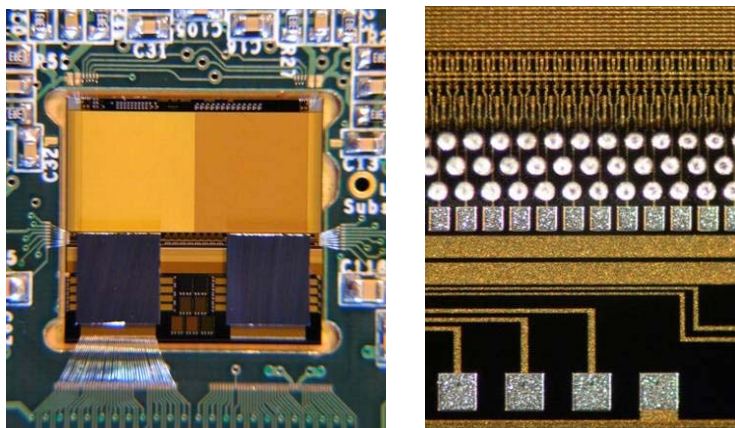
CPC1 bump-bonded to two CPR1 chips in a motherboard (left); bump bonds on a CPC1 after removing a failed CPR1 chip (right).
